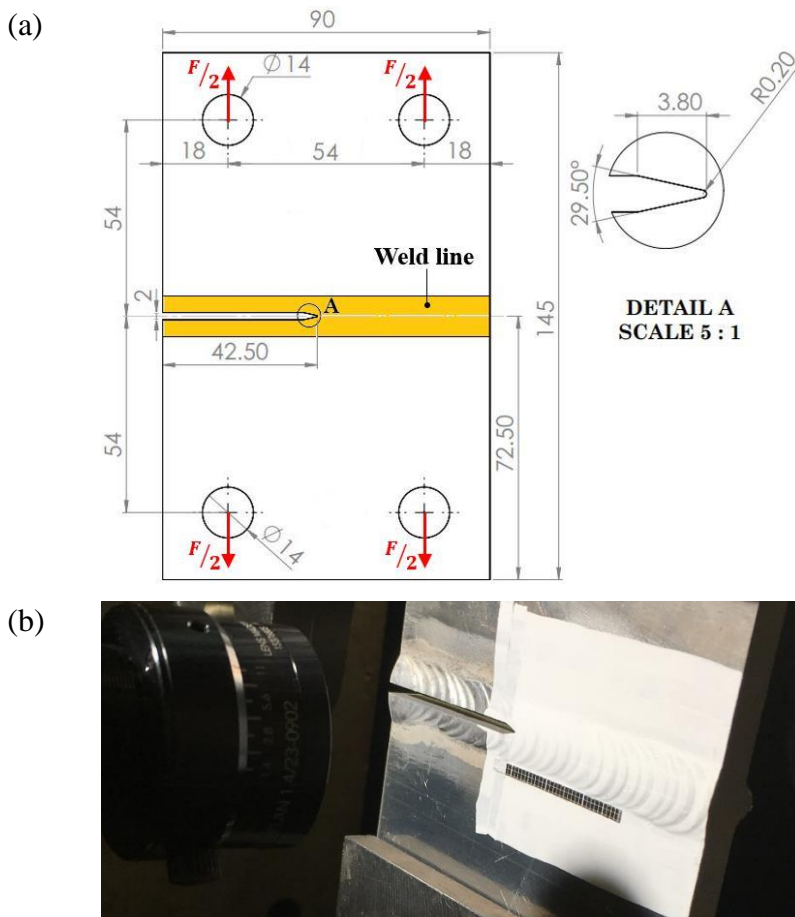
(a) CTS specimen, dimensions are in mm (b) Digital cameras for measuring crack length on both sides of the specimen.
